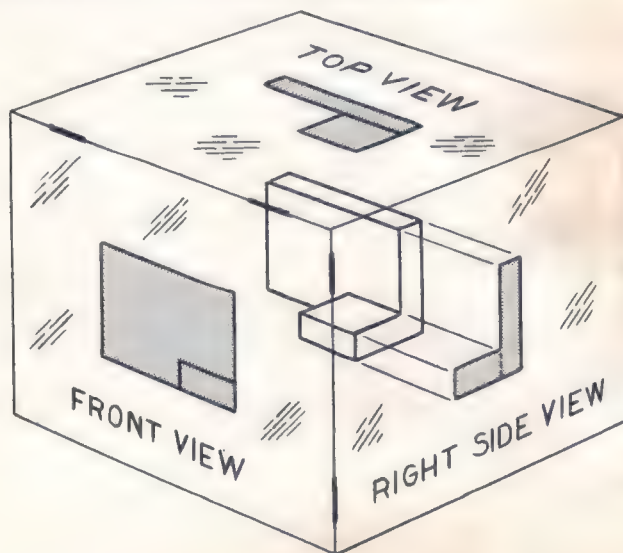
PROJECTING IMAGE TO FORM RIGHT SIDE VIEW
